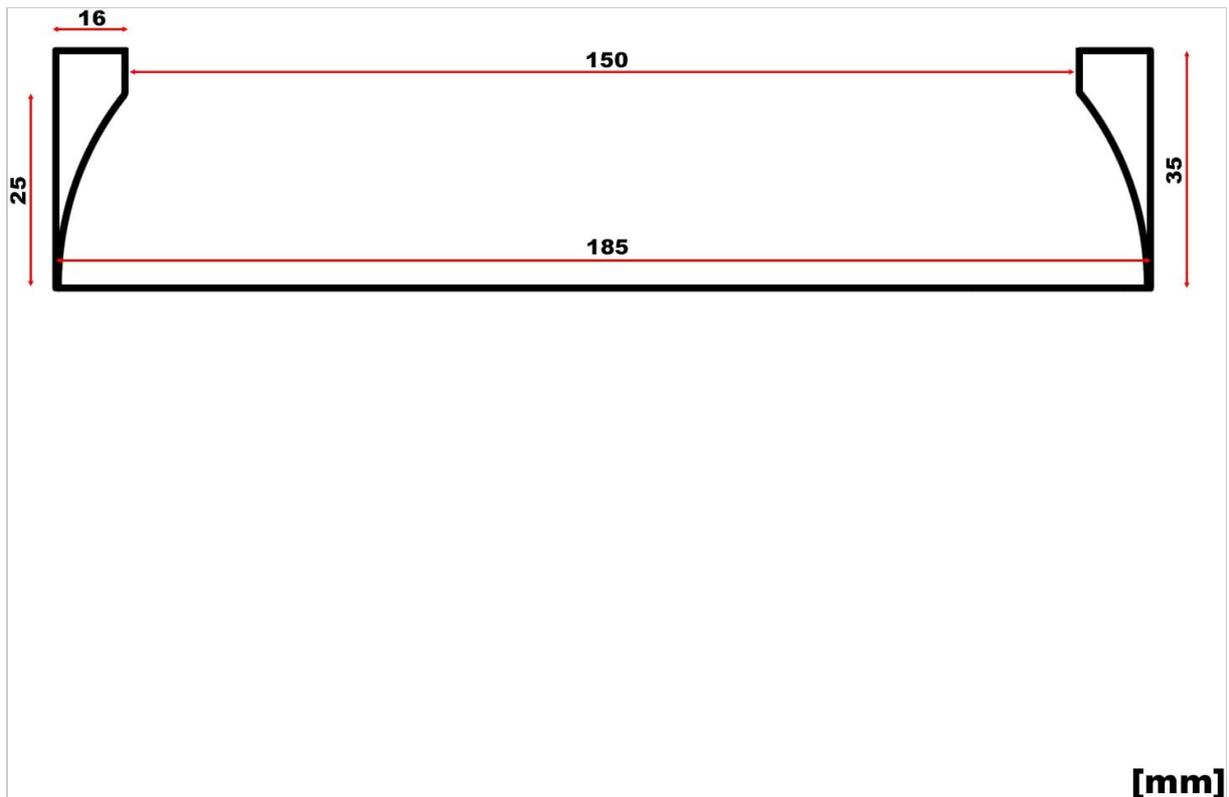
Technical drawing illustrating key dimensions of the ramp in millimeters. This provides precise measurements for planning usage.
